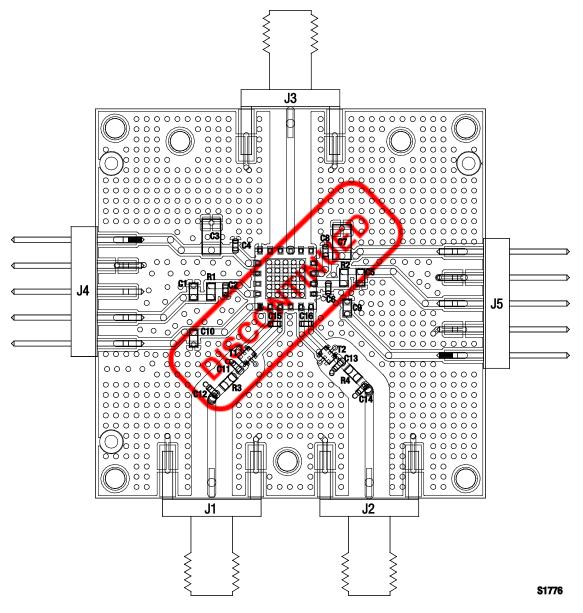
SKY65344-21 Standalone Evaluation Board Assembly Drawing
